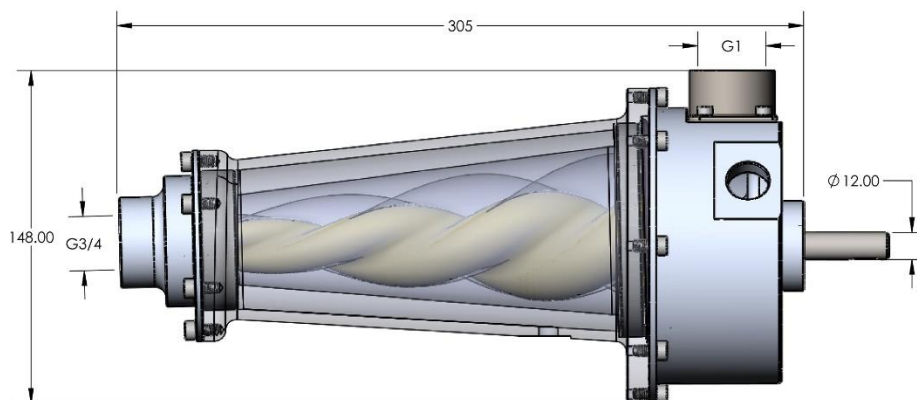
Dimensional drawing of the bare-shaft conical screw compressor VERT.80
